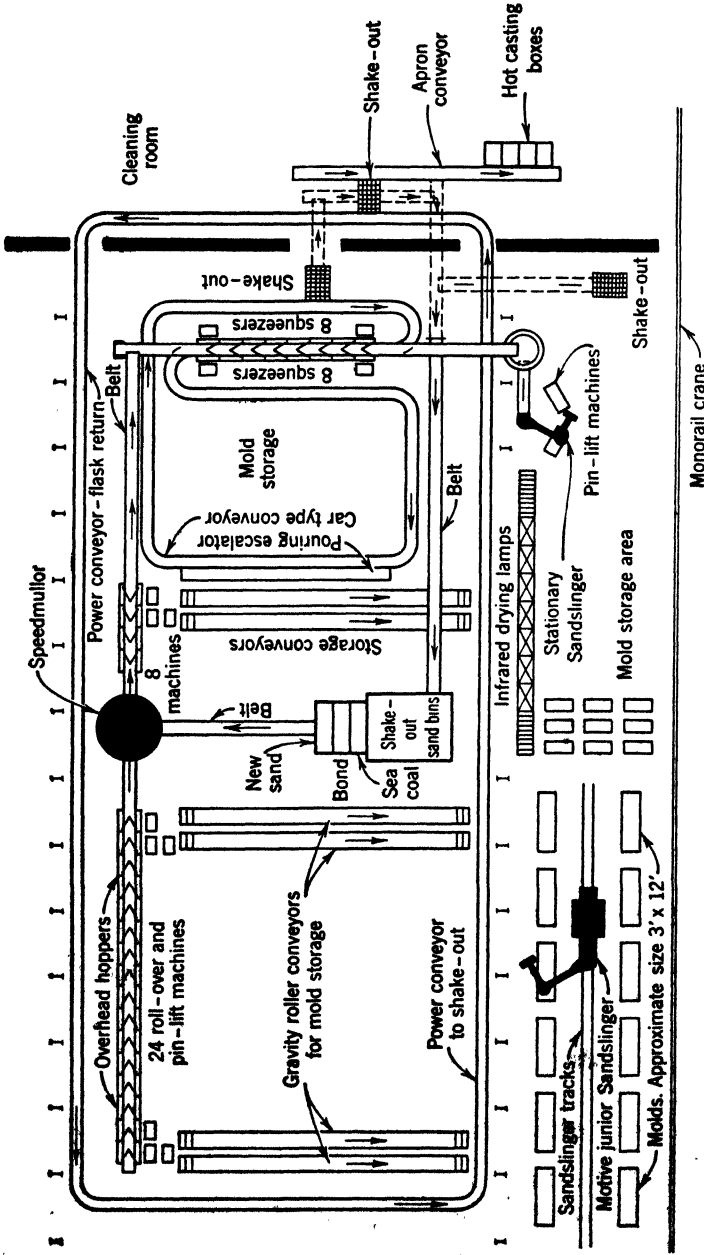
Plan of a foundry producing a large variety of castings, both large and small. (Courtesy of Beardsley & Piper Co., Chicago, Ill.)
